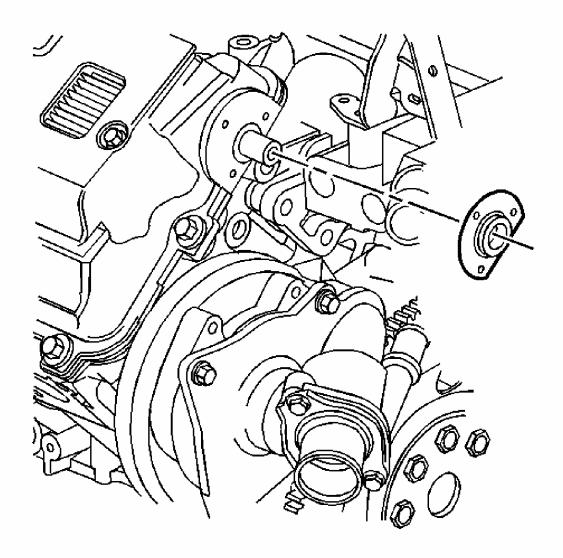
View of Camshaft Seal Courtesy of GENERAL MOTORS CORP.
